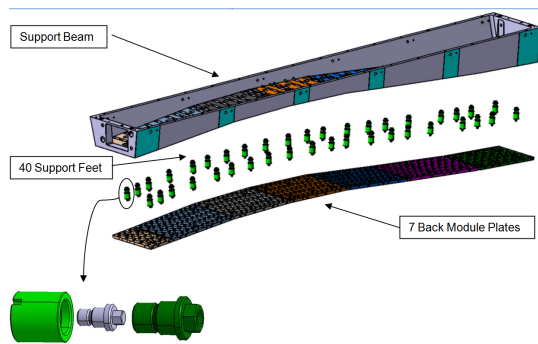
Exploded view of super-module. Front inserts, crystals and capsules with APDs are not shown.
